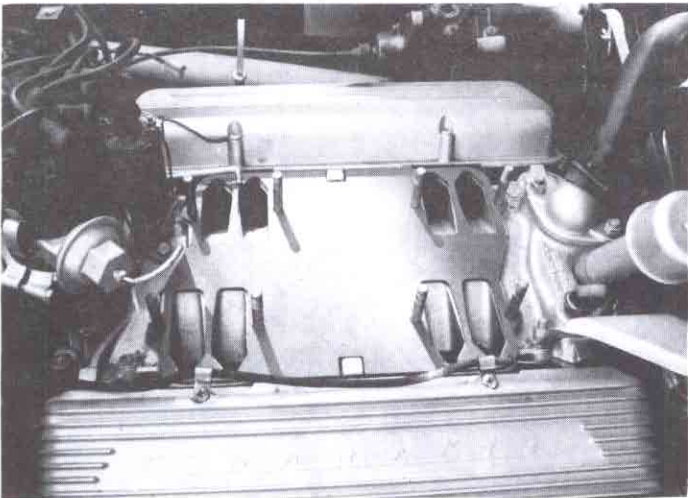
Photo B shows FI intake with 1/8-inch gasket. You can no longer read the part number.
